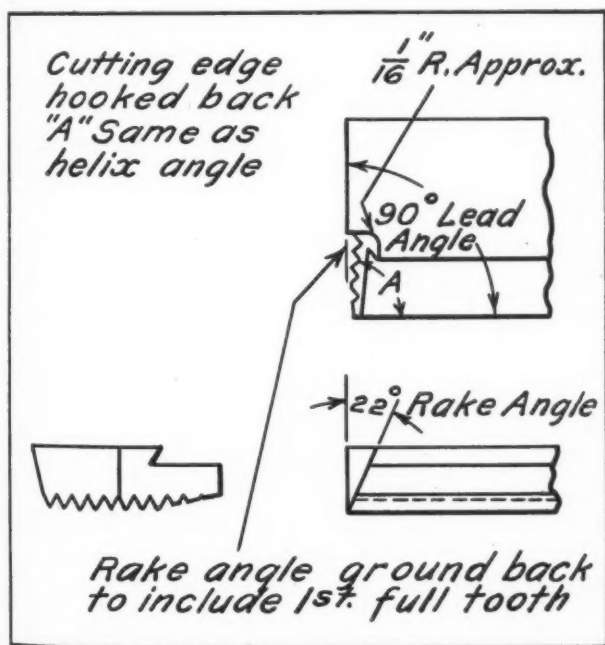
Chaser with Special Hooked Form of Grind for Cutting Straight Threads of Standard Pitch and Diameter without a Lead-screw
